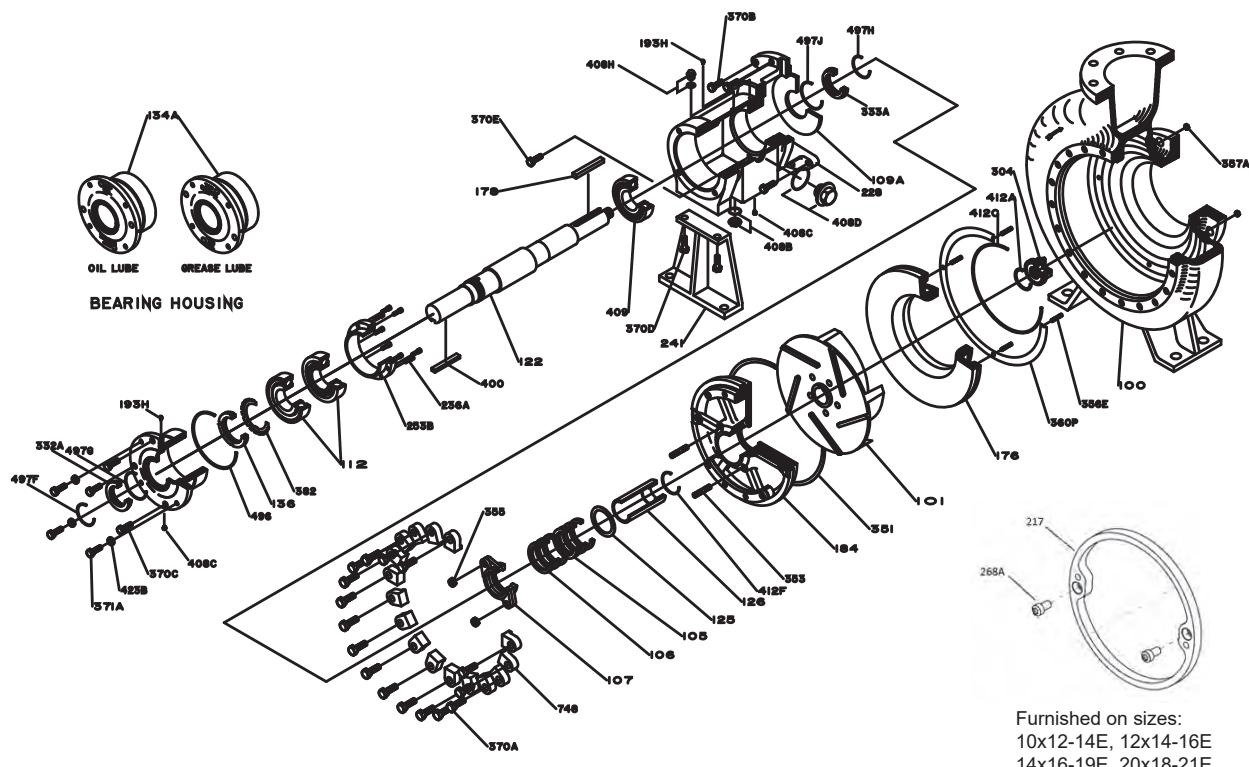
Exploded view of 3180 and 3185 S, M, L, and XL groups
